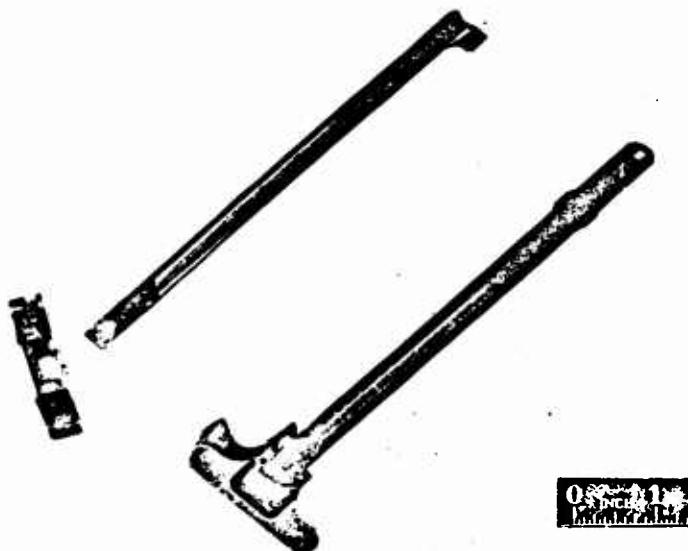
Broken Charging Handles Showing Separation of Tang from Handle at Weld.
